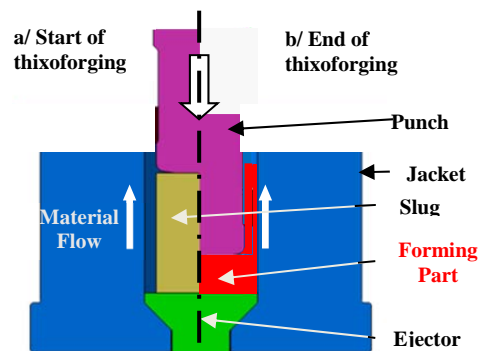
Illustration of tube shaping by backward thixoextrusion (a) start of thixoforging; (b) End of thixoforging.
